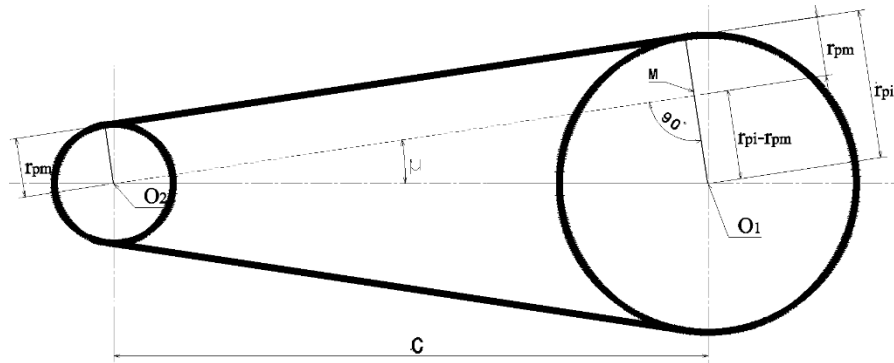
First Stage Speed Reducer (Pulley Drive Assembly)
